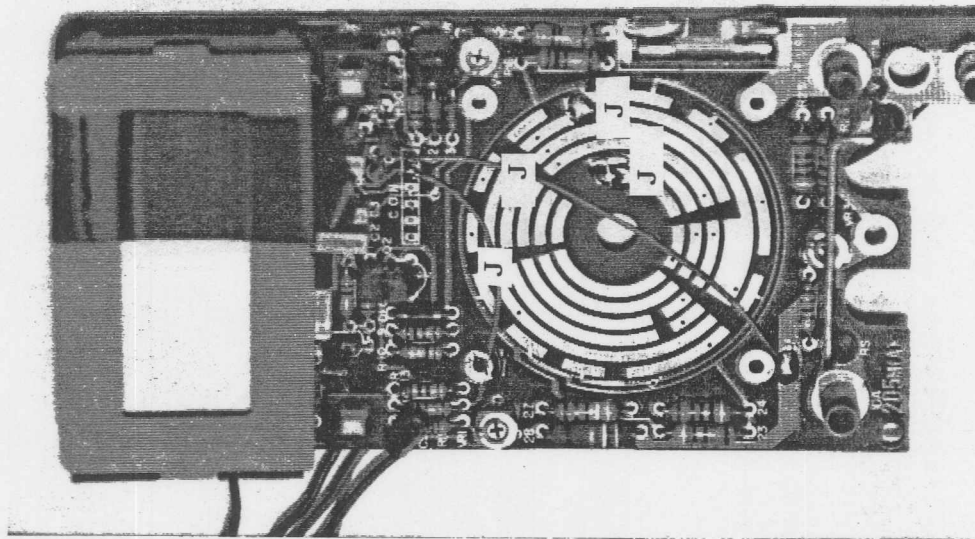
DVM Top View - Shows Jumpers to Bypass Switch
